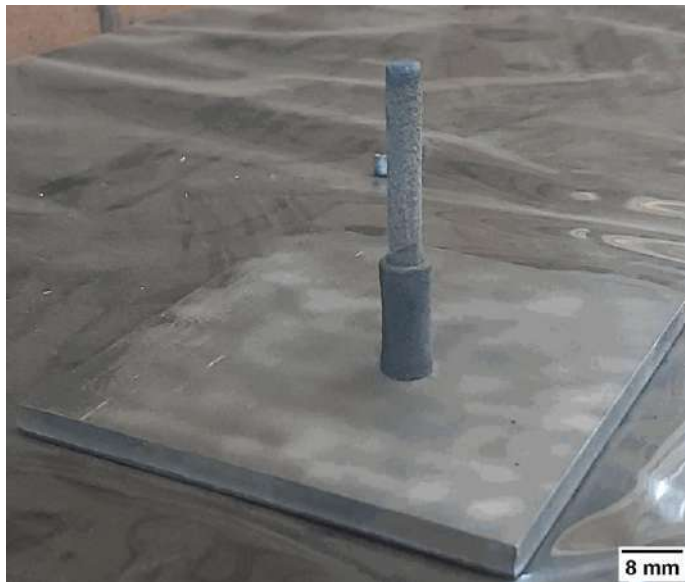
LENS® fabricated cylindrical rotary burr without preheat.
